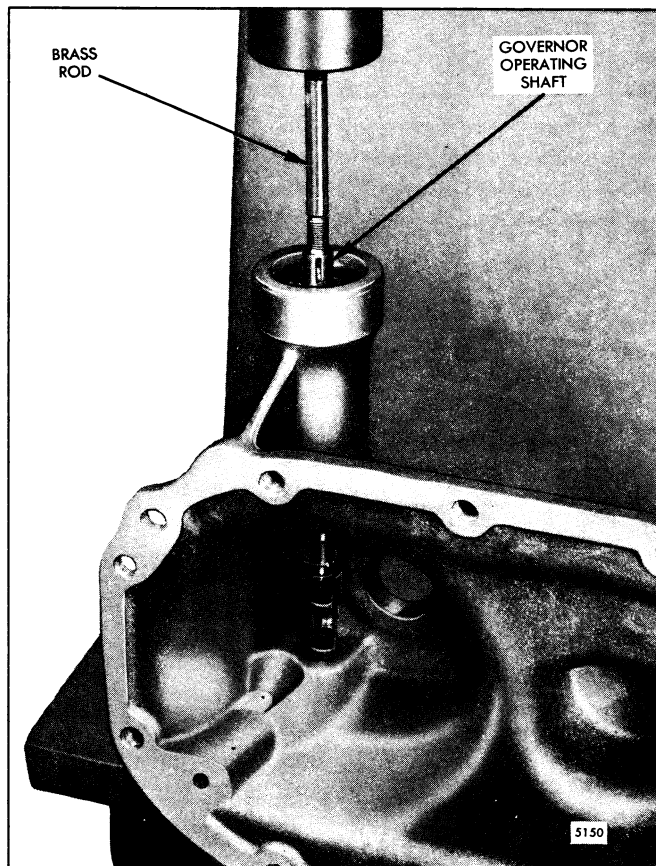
Removing Operating Shaft From Weight Housing Upper Bearing
